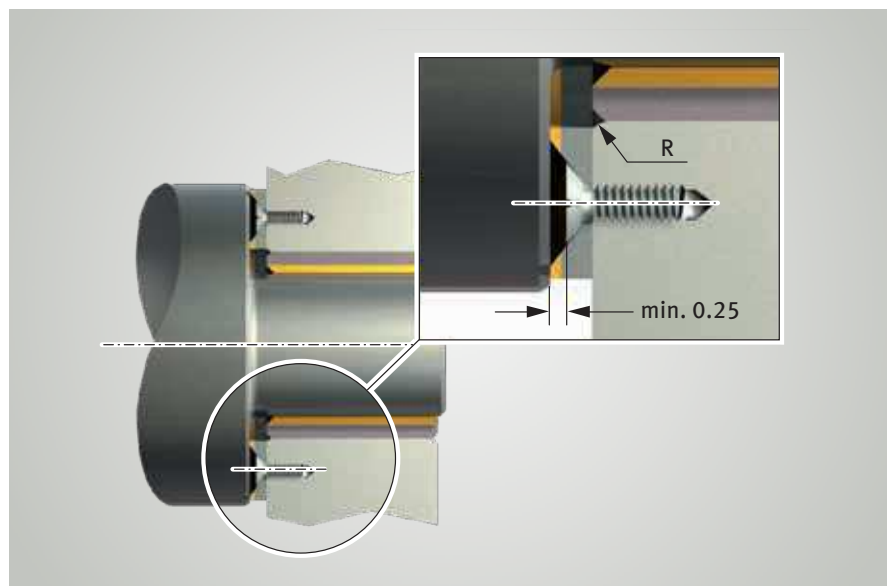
Attaching a PAW thrust washer without a recess in the housing
